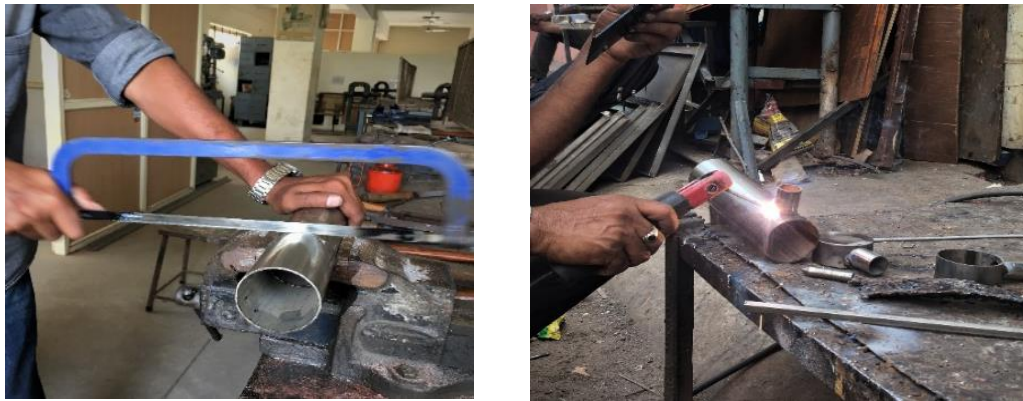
Welding process of the tube using welding gun in the workshop
